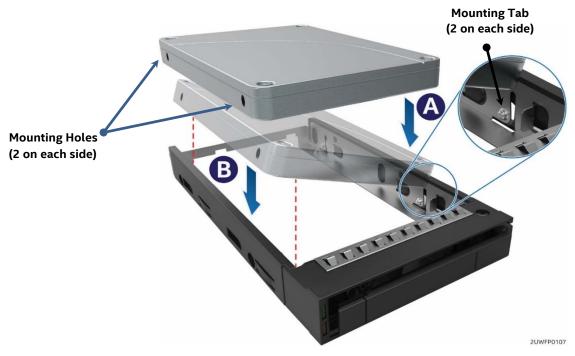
2.5" Drive Carrier Assembly – Drive Installation to Carrier
